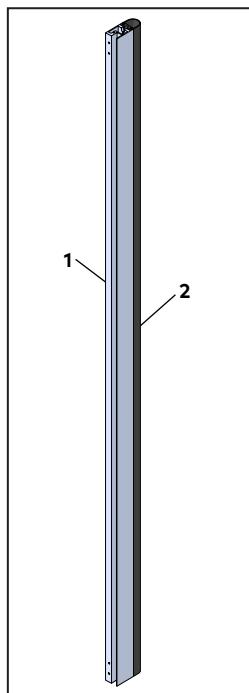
Quarter post/end wall leading edge sensor installation
